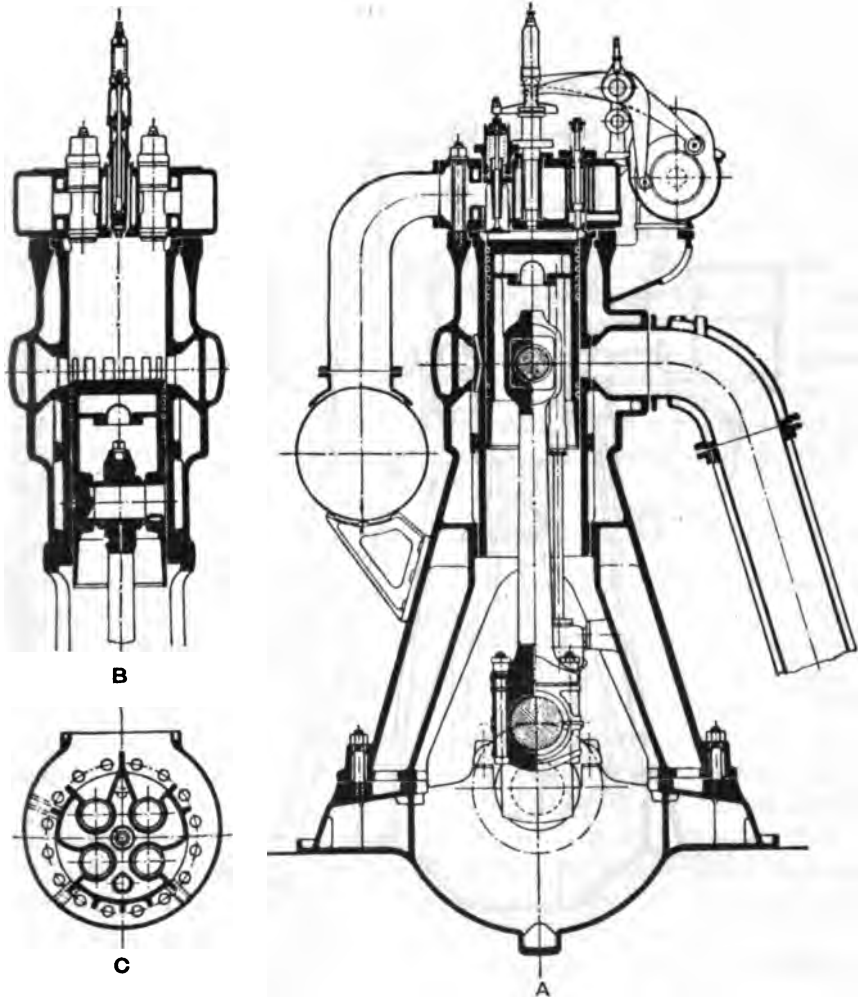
Two-cycle engine with air admission through cylinder head, showing scavenging air valves. Exhaust ports uncovered by piston are shown at A.
